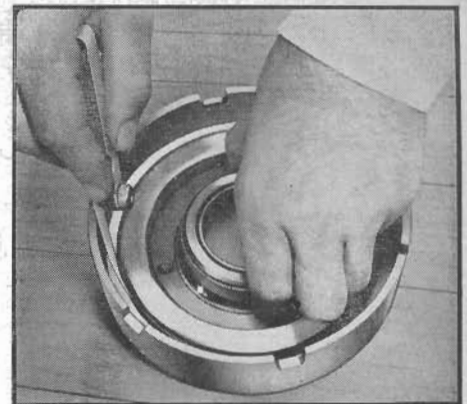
Checking seating of clutch piston outer seal. 1950-52
